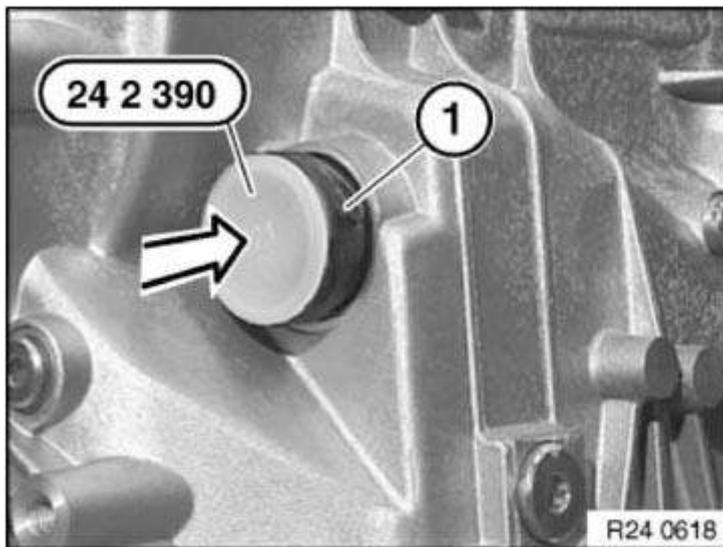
Inserting Special Tool (24 2 390) In Sealing Cup
